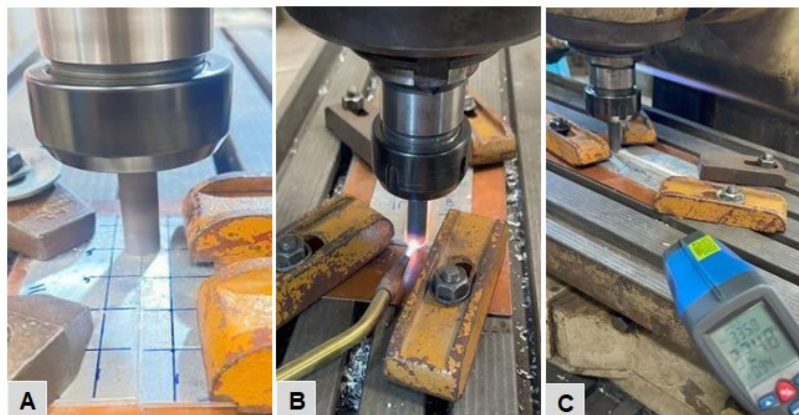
The apparatus, experimental configuration, and steps used in the friction stir welding (FSW) technique
